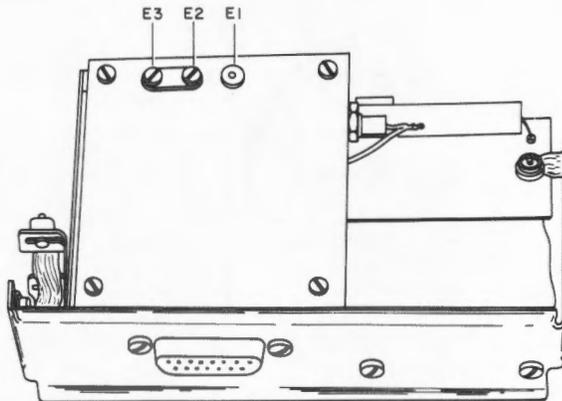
Line Sensor Range Adjustment, Parts Location
